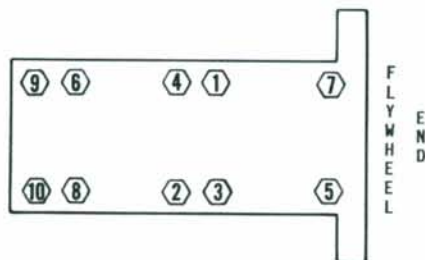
Tighten ten large crankcase cap screws in sequence shown. Refer to text for tightening torque specification.
